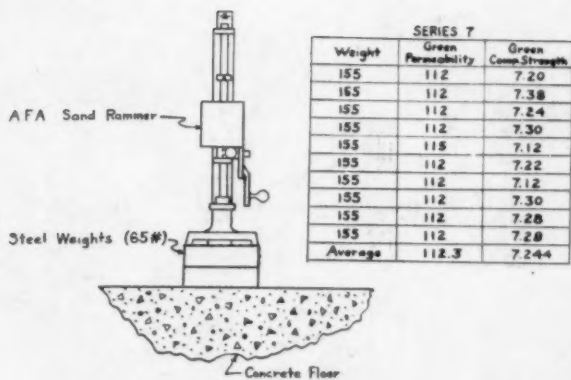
A.F.A. SAND RAMMER MOUNTED ON CONCRETE FLOOR.
